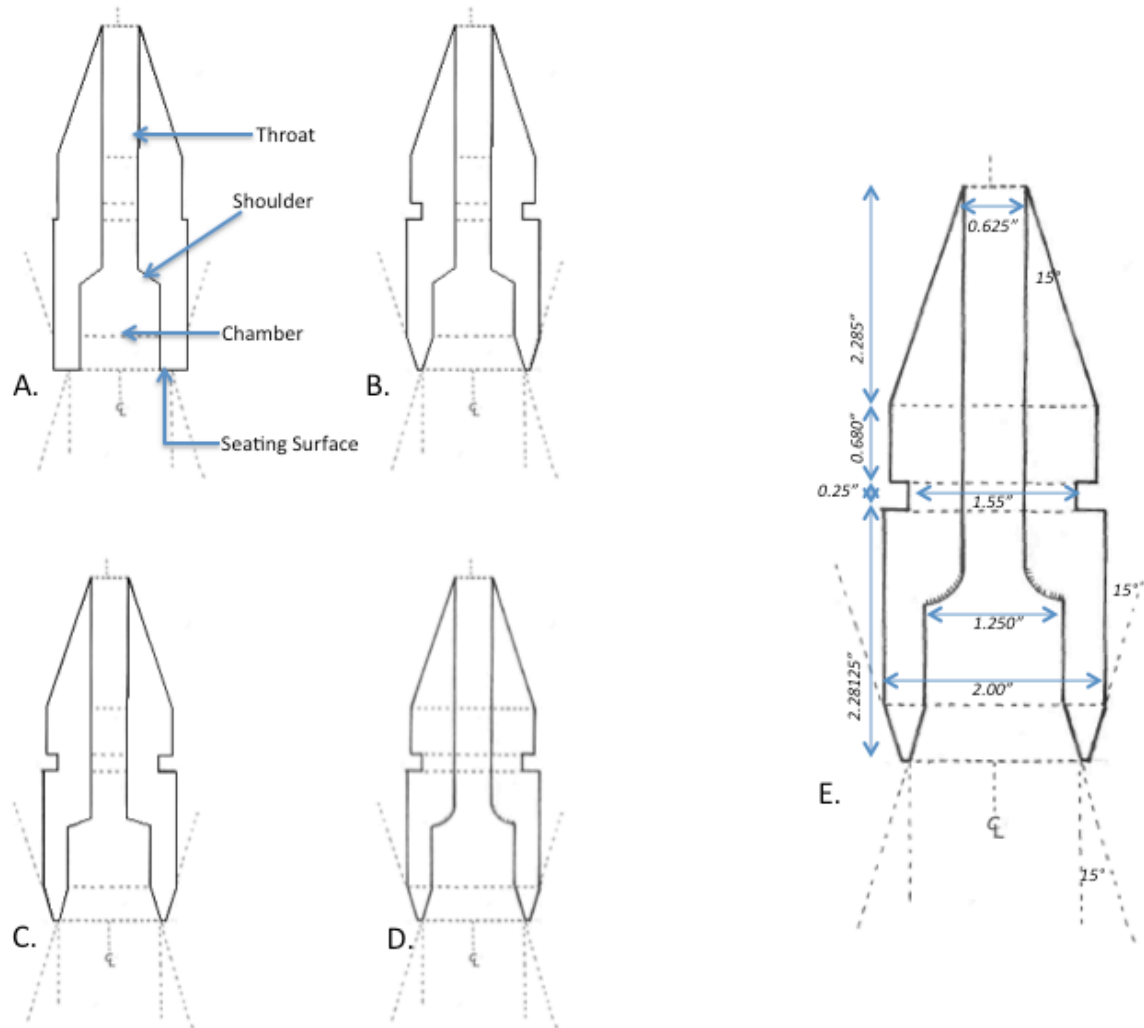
This series of diagrams shows the progressive modifications made to the nozzle assembly. A) Original nozzle assembly with 0.325 in. seating surface. B) First modification to include the O-ring groove to seat to the top plate and the tapered base, reducing the seating surface to 0.100 in. C) Nozzle modified to taper the shoulder portion of the chamber to 15 degrees from 28 degrees and smooth the surface of the shoulder and bore. D) Modification to cut radius into shoulder to provide transition from chamber to bore. E) Final modification to cut axial grooves into the shoulder and rough the wetted surface.
